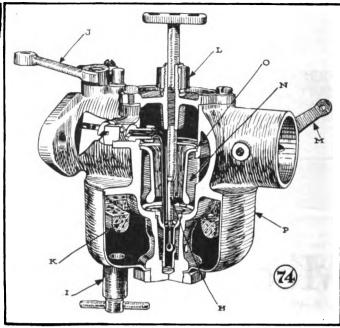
Section of Holley Model G carbureter. H is the needle valve, I the drain cock, J the throttle lever, K the float, L, needle valve locknut, M, choke throttle lever, N, choke tube, O, locking ring and P, bowl
